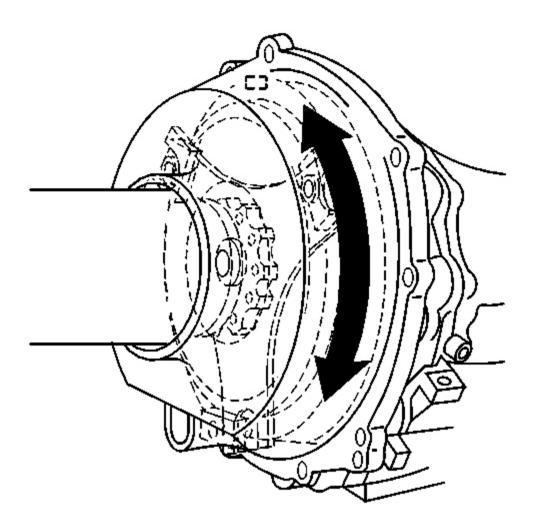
Engine Flywheel & Flexplate Courtesy of GENERAL MOTORS CORP.
